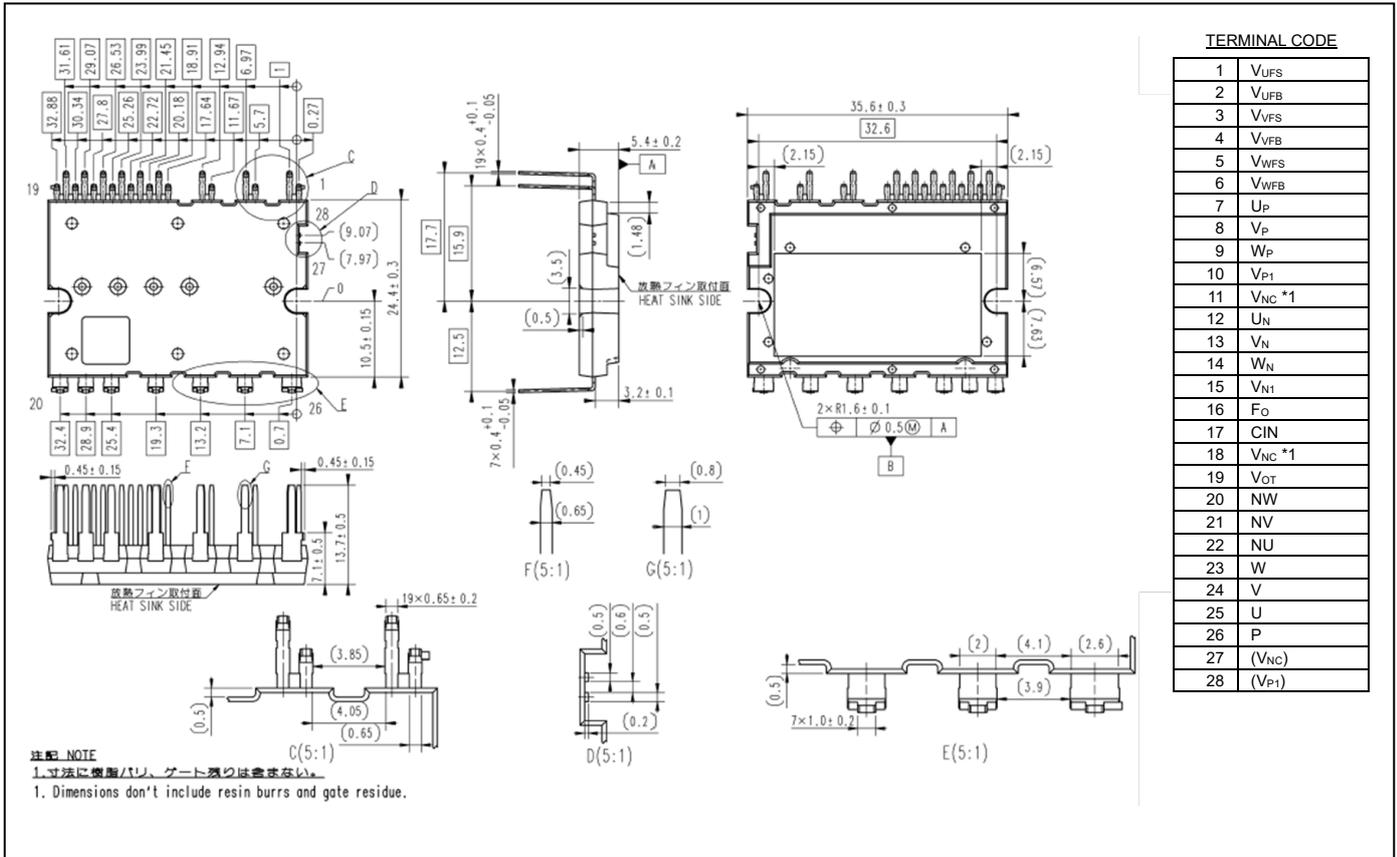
PSSxxSF1F6 package outline drawing (Dimension in mm)
